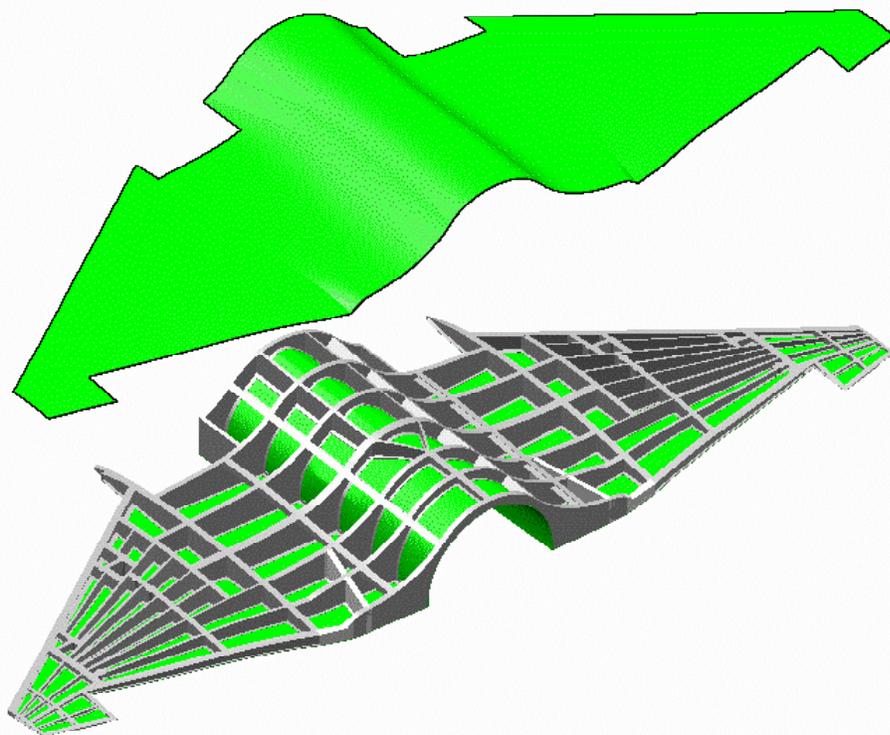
Upper tip-to-tip wing carry through skin panel with mating frame assembly (understructure) shown below.
